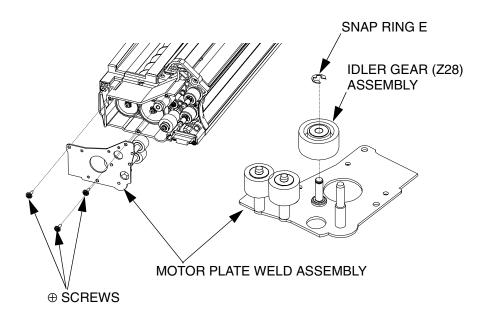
Removal of the Idler Gear (Z28) Assembly
